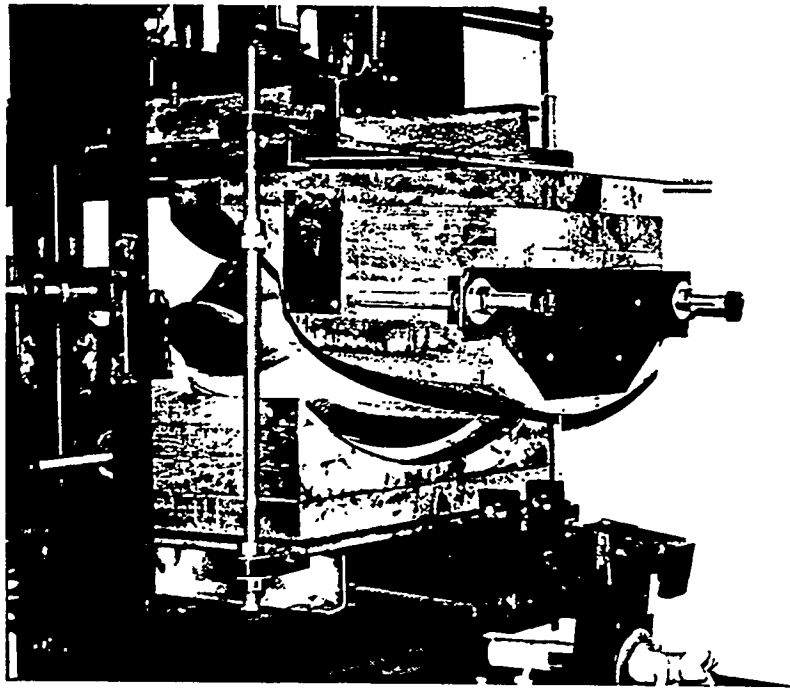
Molds, Plexiglass Panel and the Hydraulic Press
